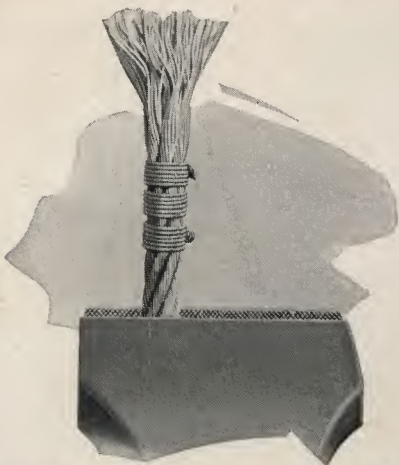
Ends of the wire are now broomed out, so that they may be readily cleaned.
